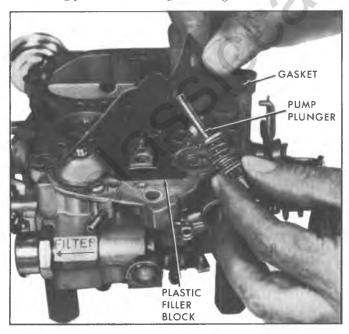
MQ—Removing Air Horn Gasket and Pump Plunger
